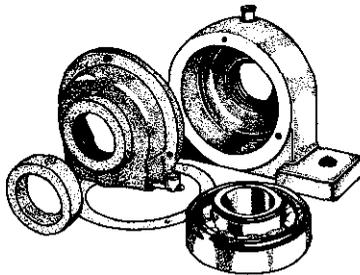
Disassembled View of Pillow Block Ball Bearing
